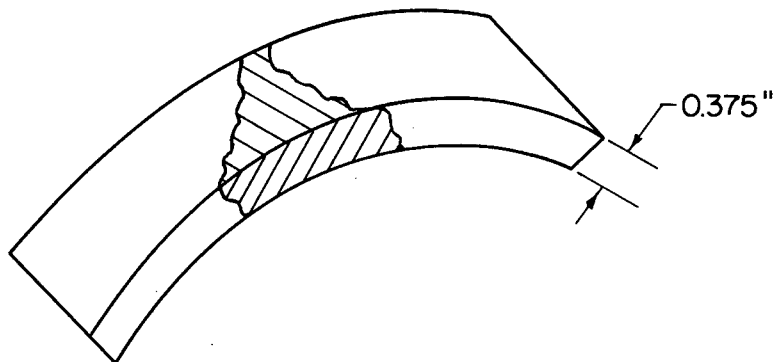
WELD-JOINT CONFIGURATION FOR WELDING PLATES FROM ALLOYS 19 AND 22
